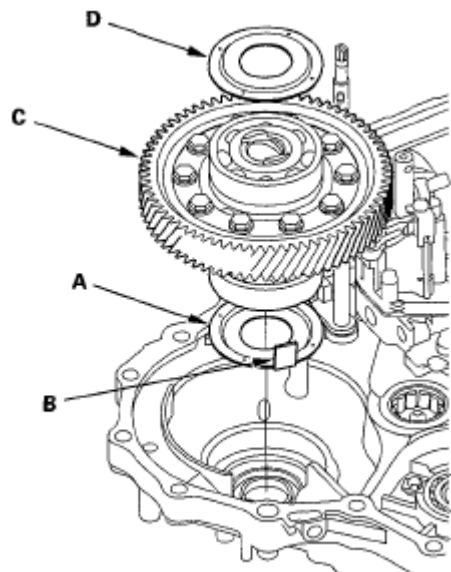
Identifying Differential Assembly, Spacer And Spacer Tab
